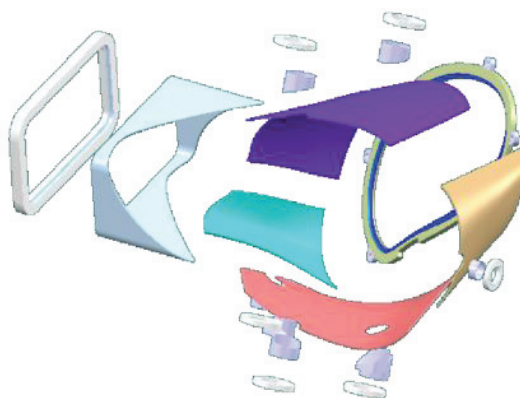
Half of the divided pieces for the vacuum vessel type A. It will be manufactured by welding 33 pieces in total.
